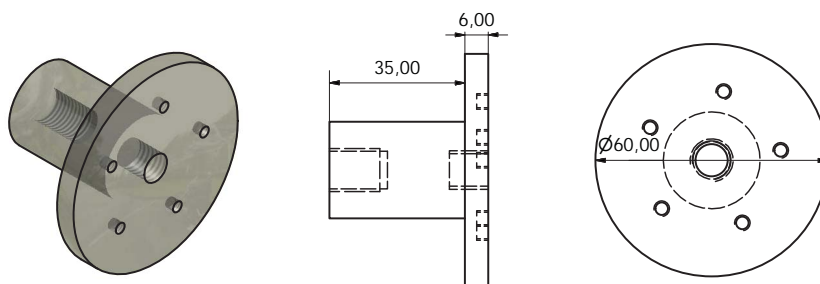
Metal piece connecting impeller with motor (units in mm)
